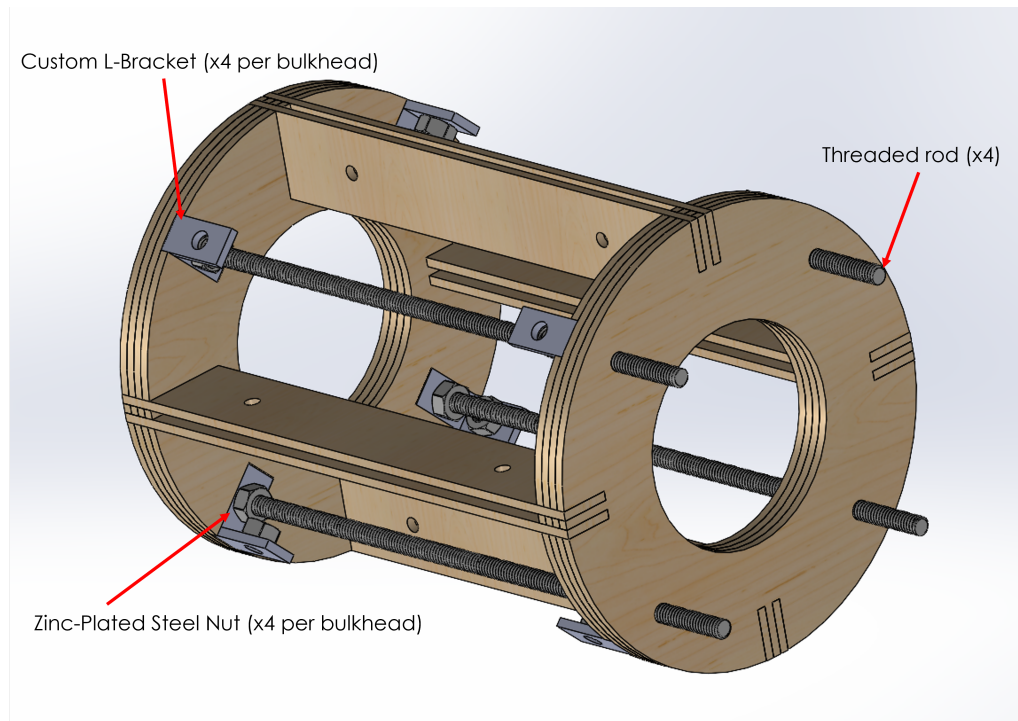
Custom L-brackets, threaded rods, and hardware added to removable fin system assembly.
